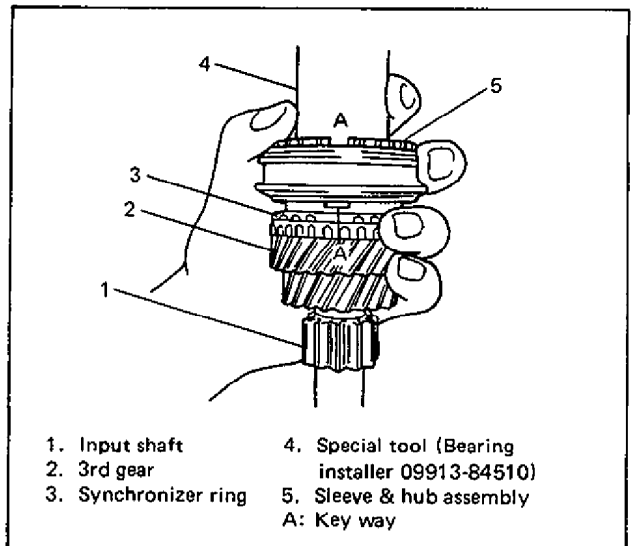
A-44 Press-fitting High Speed Sleeve & Hub
